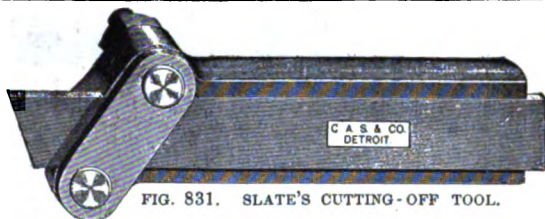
SLATE'S CUTTING-OFF TOOL.
